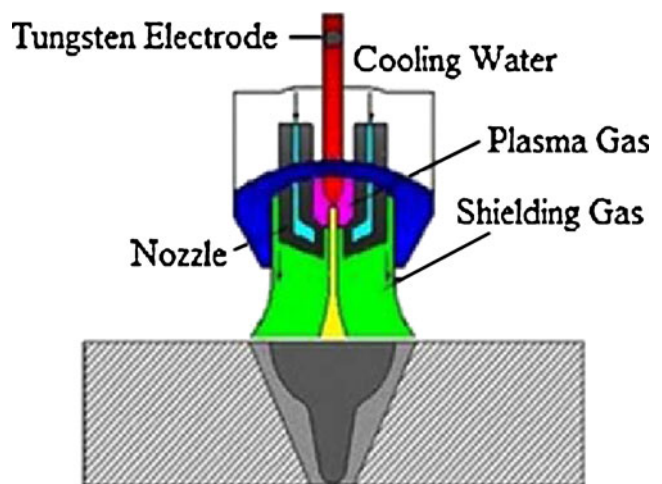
Schematic presentation of keyhole plasma transfer arc welding system
